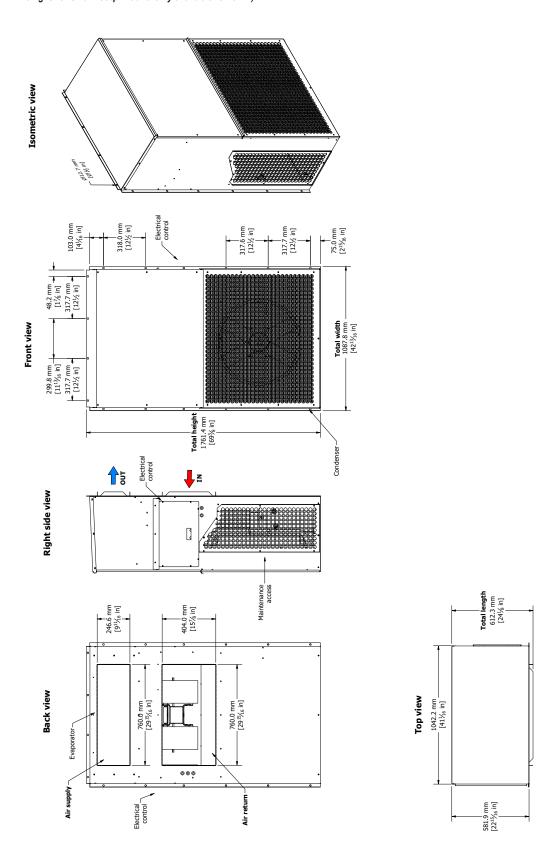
Dimensional Configuration CLIWP Cooling Only 3 & 5 RT Standard Size.
